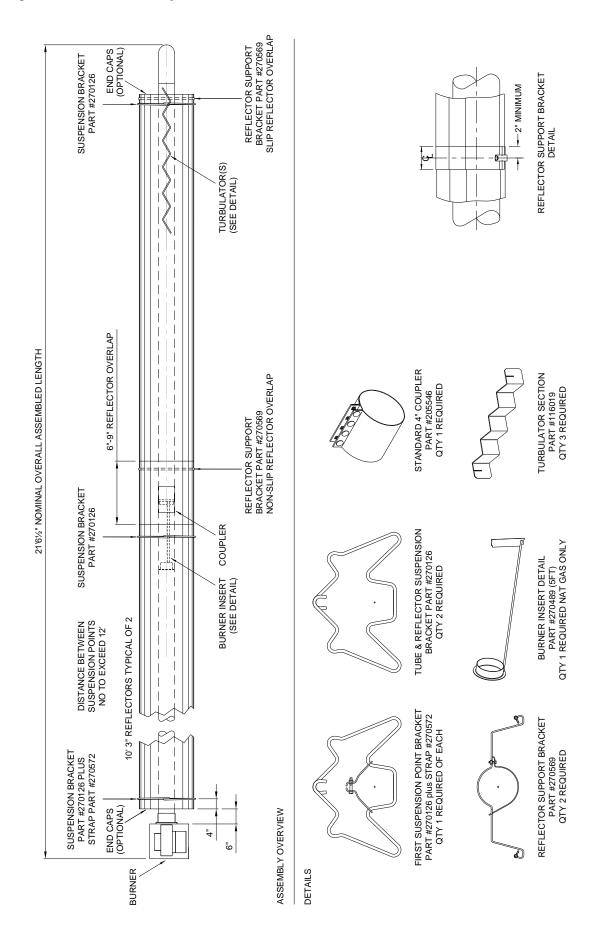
Heater Assembly: Model Linear 60-S30, 80-S30, 100-S30 and 125-S30
